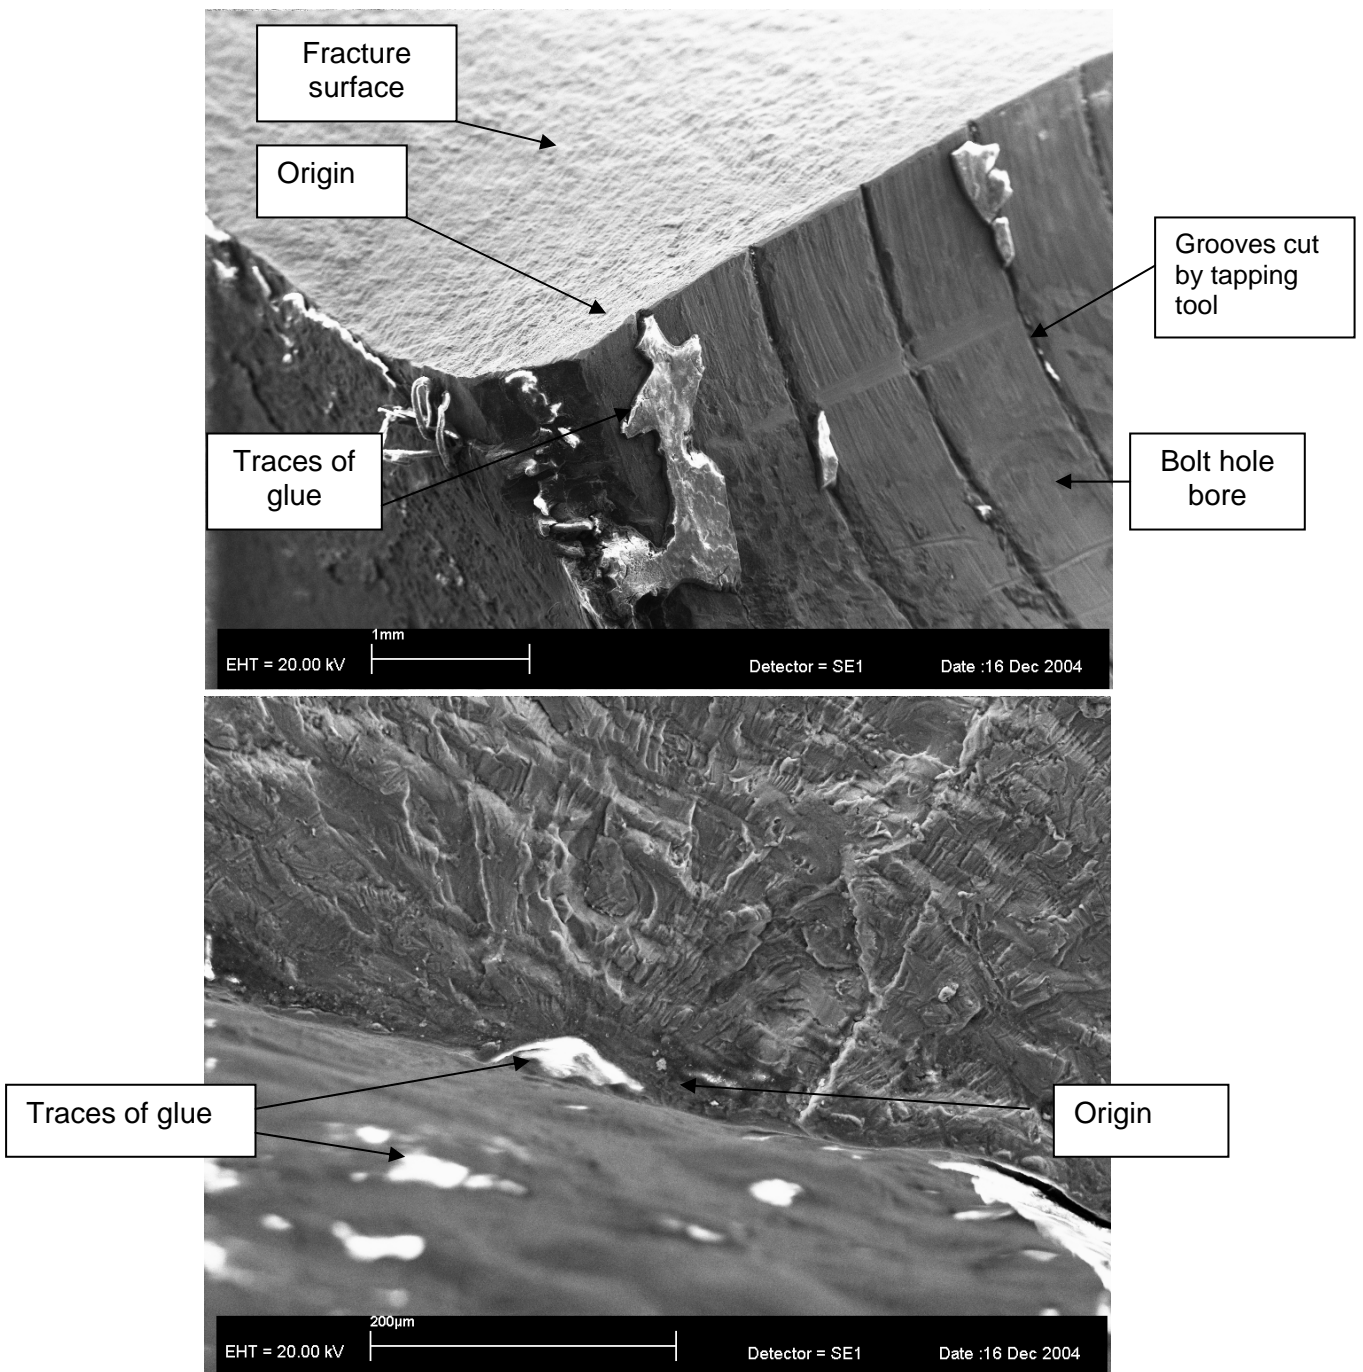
Junction of fracture surface and bolt hole bore at fracture origin.
